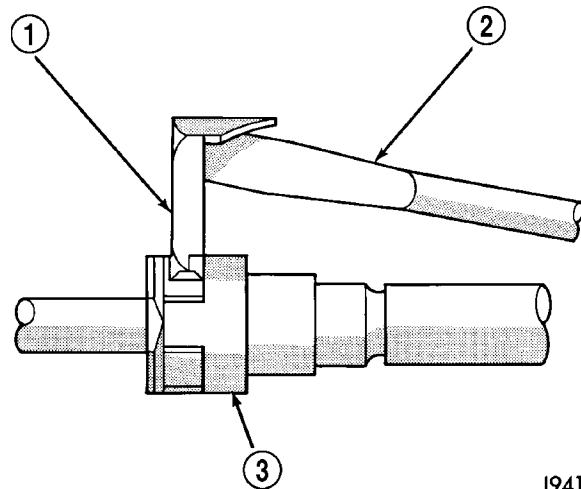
DISCONNECTING SINGLE-TAB TYPE FITTING
